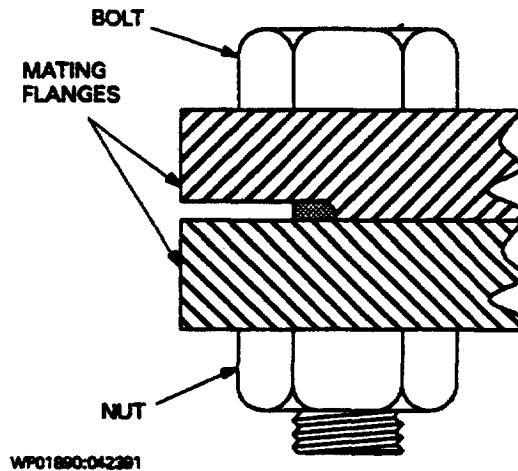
Type III Assembly: Through Bolts/Studs, Raised Face Flange
